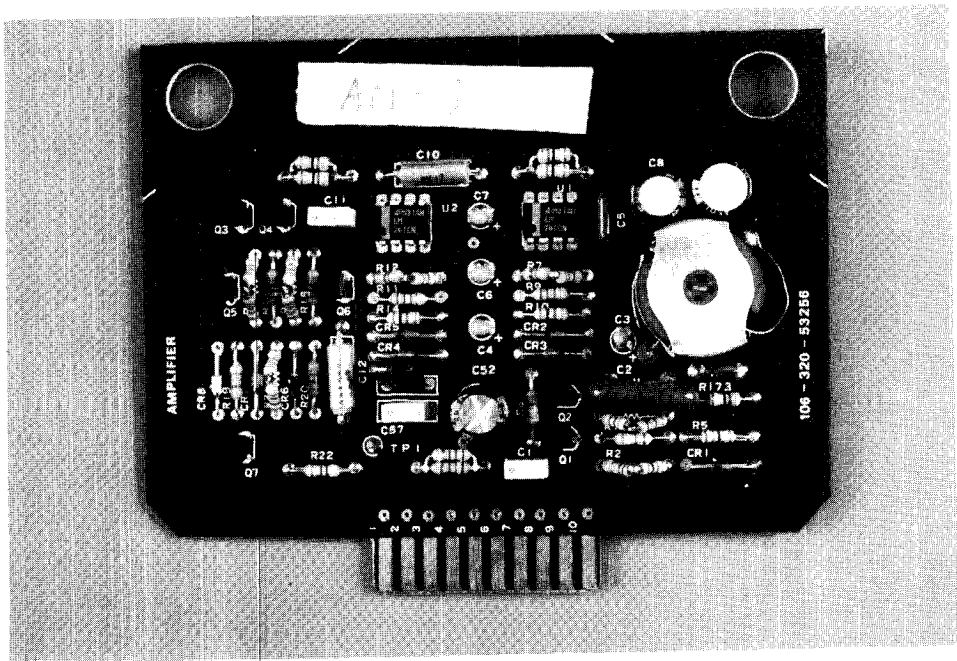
Pre AMP and Hardlimiter PCB (CH3)
